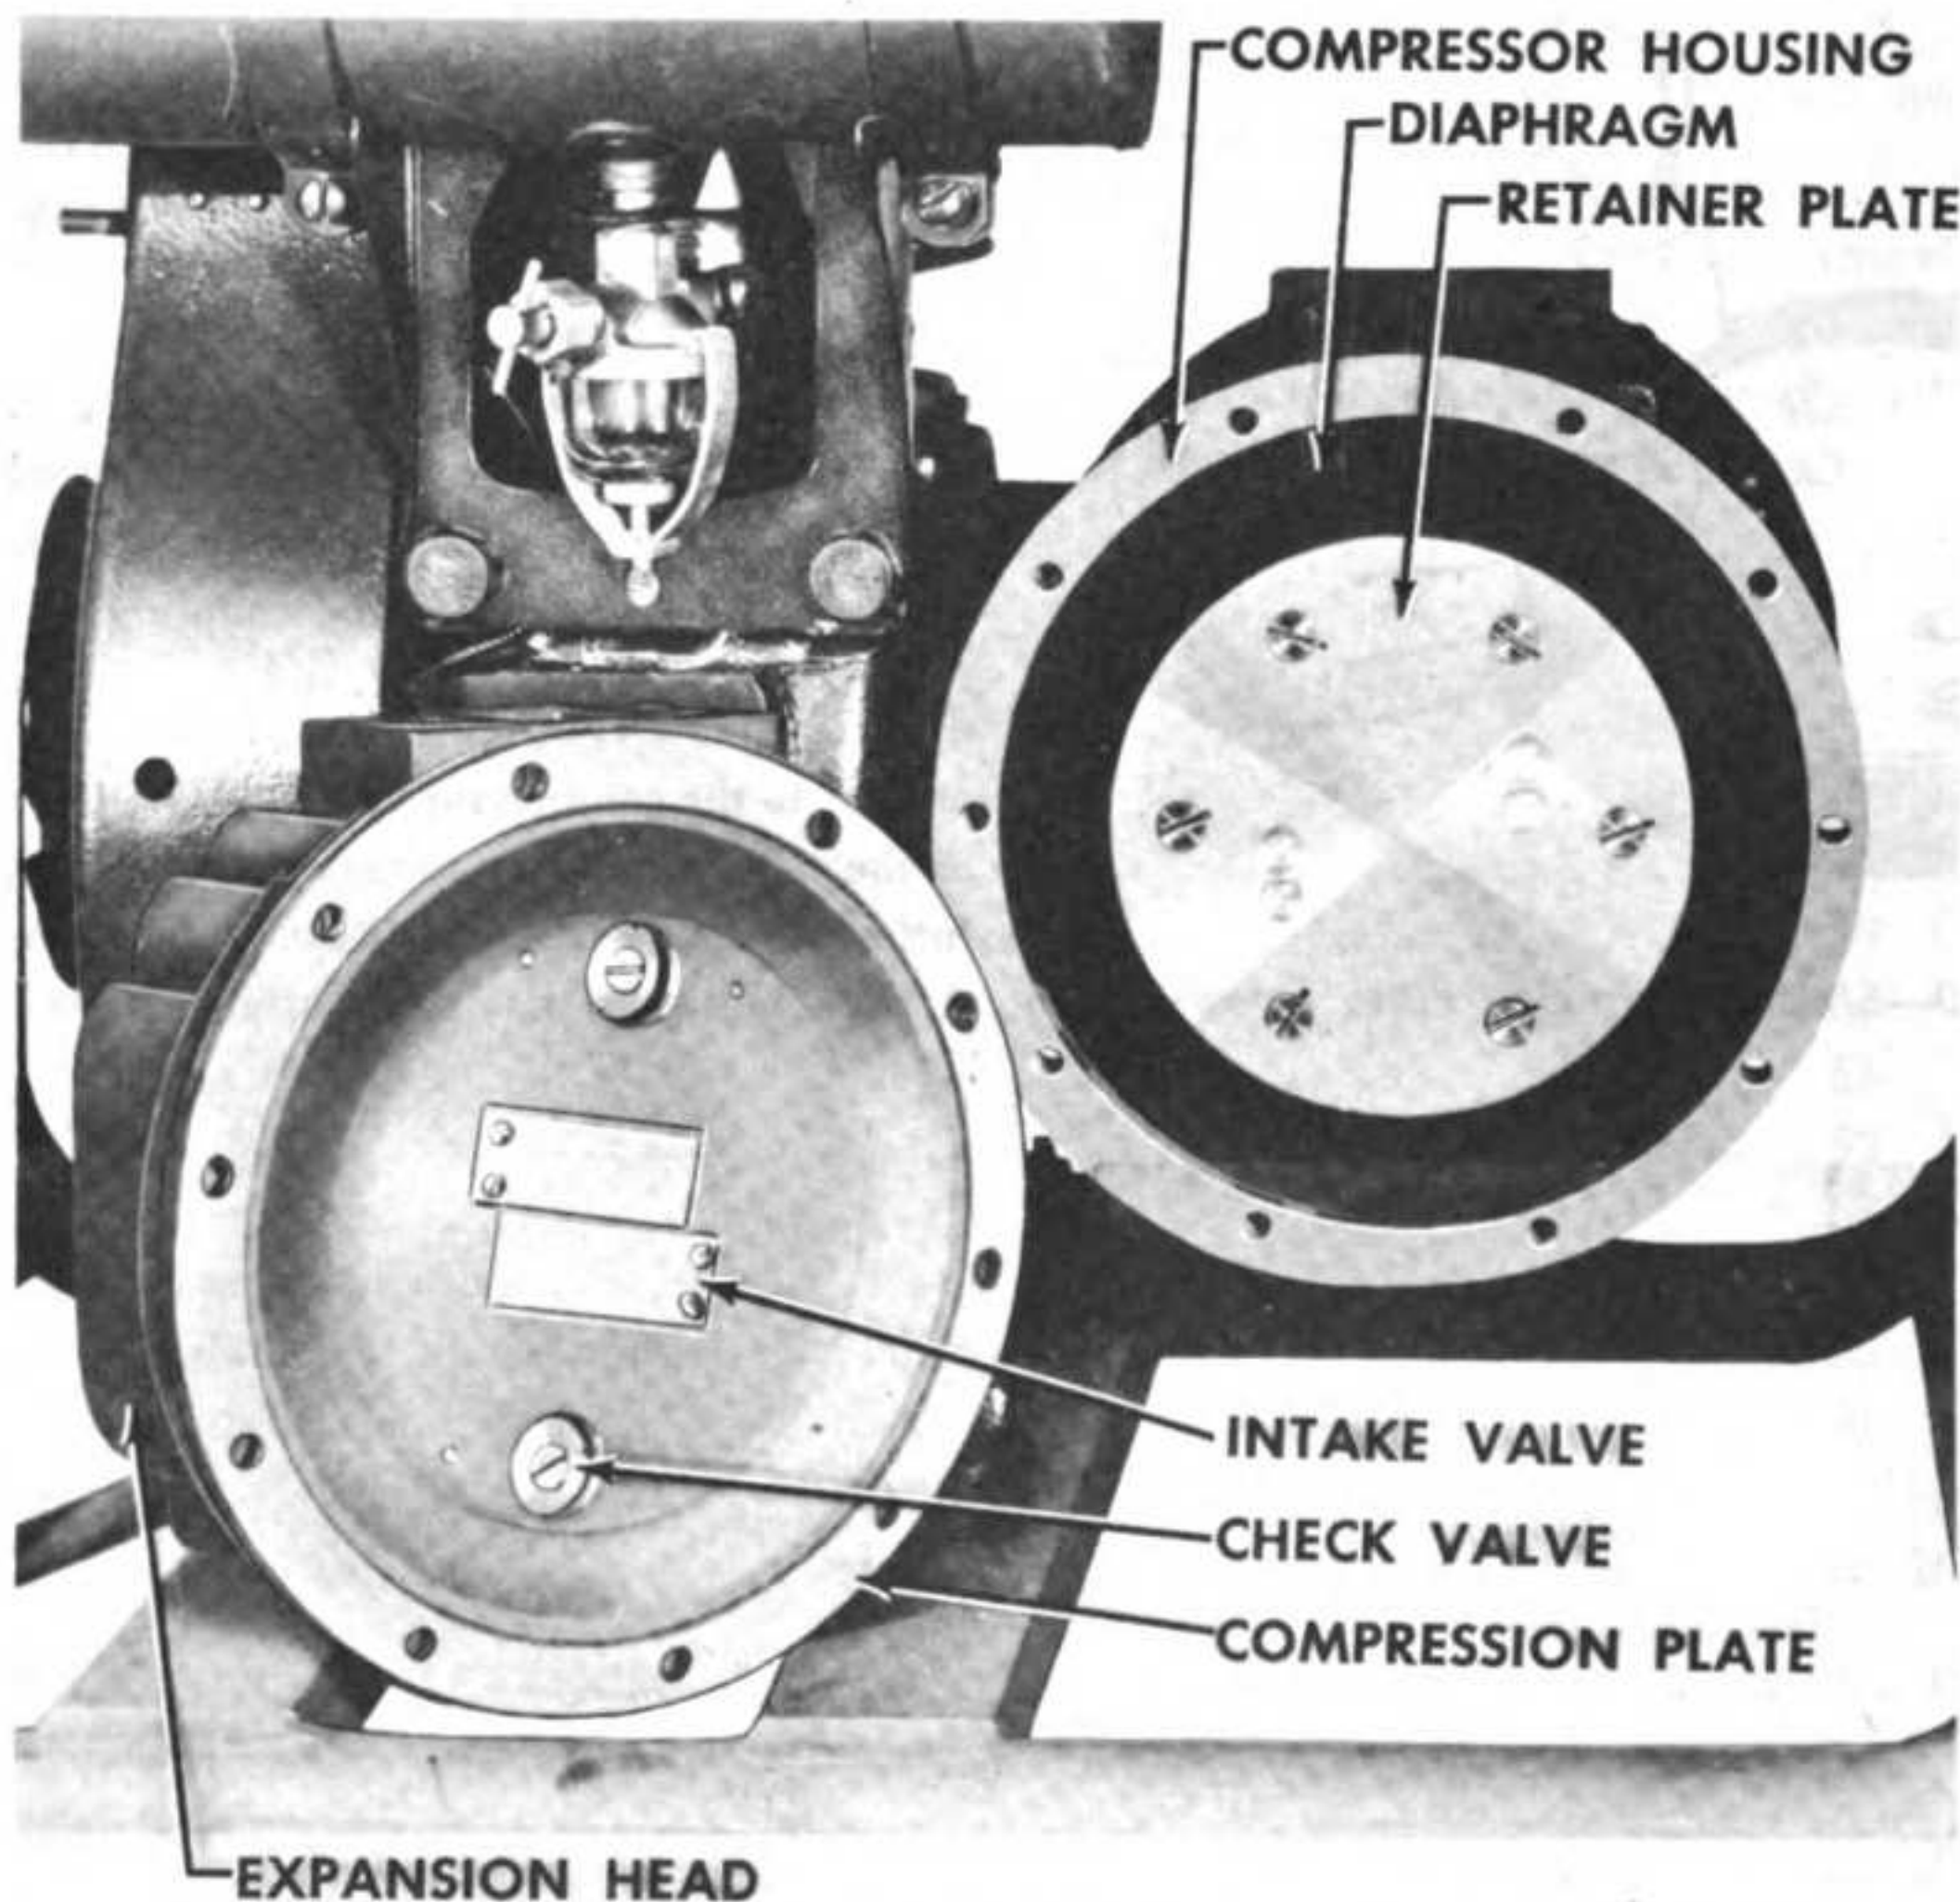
Expansion Head and Compression Plate Removed from Compressor Housing
